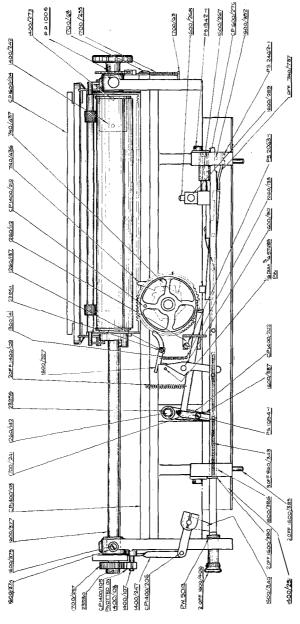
Morse Page Printer Carriage Assembly (Elevation). 1600/330.
